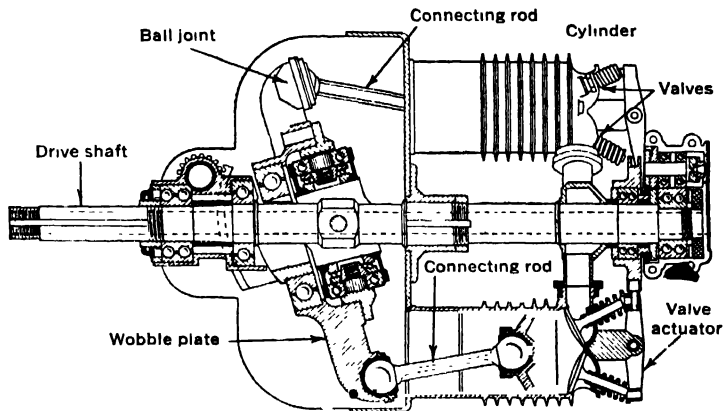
A Typical Example of a "Wobble" Plate or Barrel Type Engine, Known as the Macomber, Was an Air-Cooled Rotary Form.
